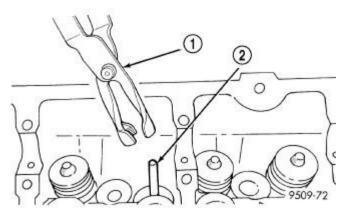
Valve Stem Seal-Removal/Installation Courtesy of CHRYSLER LLC
